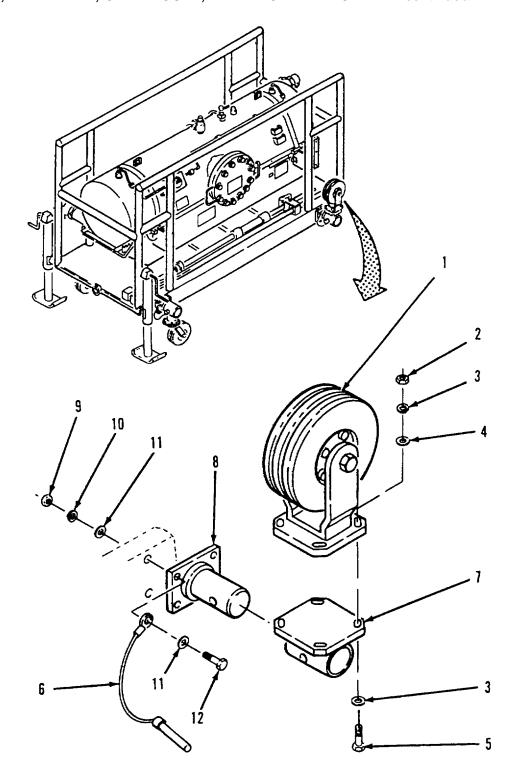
Wheel, Detent Pin, Gear Mount, and Pivot Replacement
